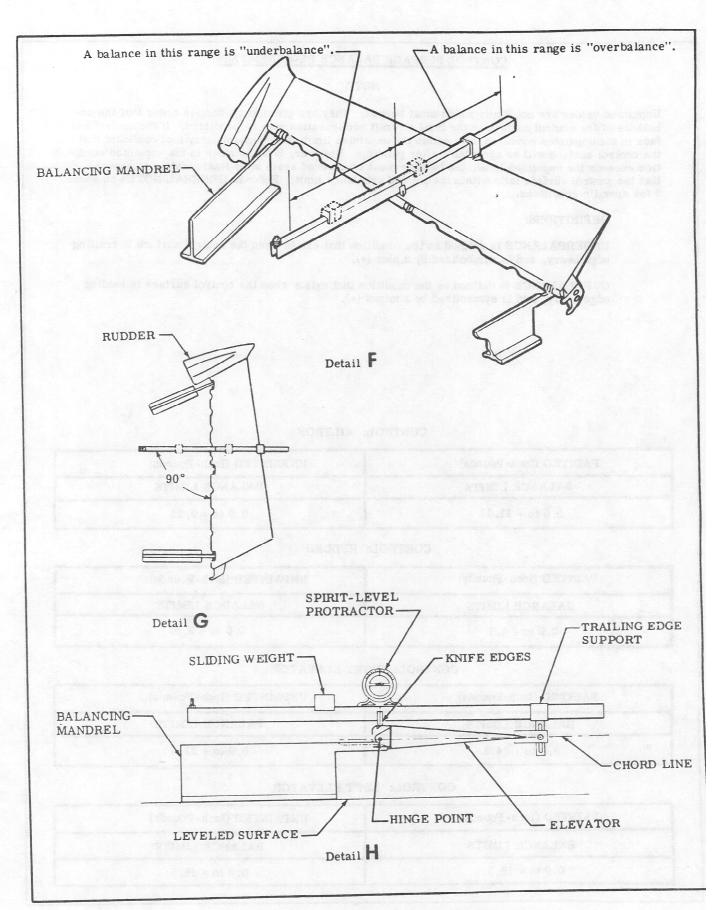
Control Surface Balancing (Sheet 4 of 5)
